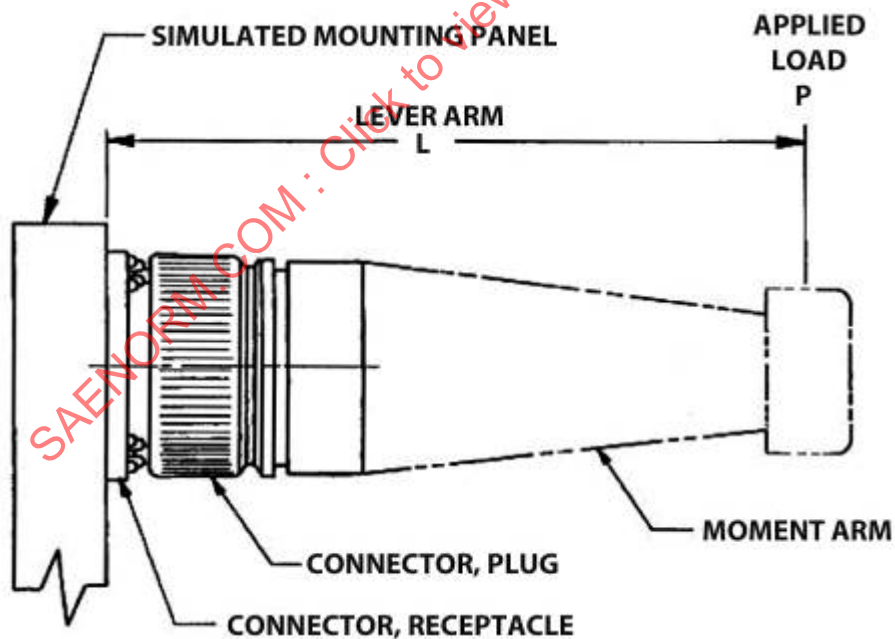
EXTERNAL BENDING MOMENT TEST SET-UP
